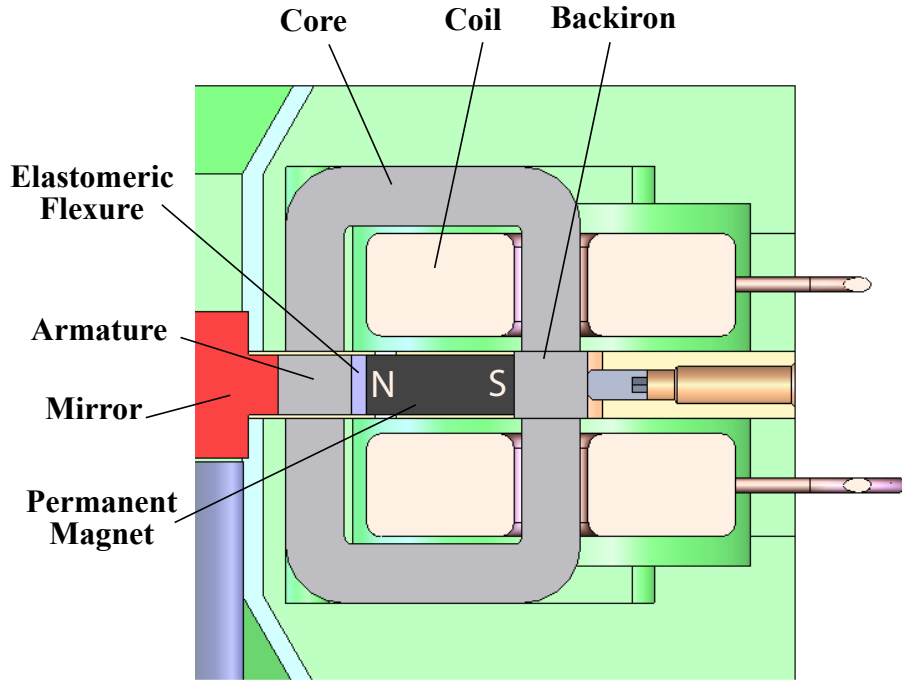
Cross-sectional view of the magnetic actuator showing component detail.
